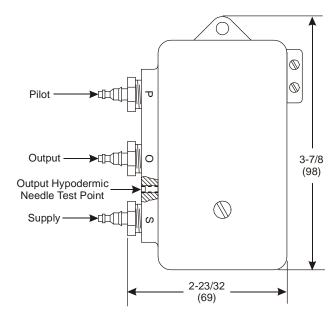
V-9502 Port Identification and Dimensions, in. (mm)
